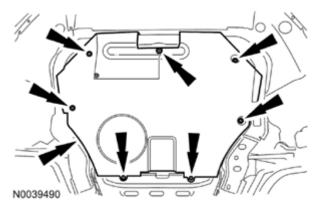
Locating Underbody Cover And Screws Courtesy of FORD MOTOR CO.
